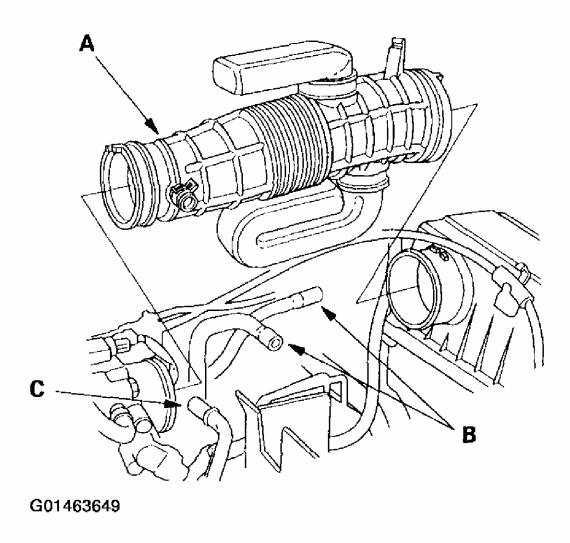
Installing The Intake Air Duct, The Vacuum Hoses & Breather Pipe Courtesy of AMERICAN HONDA MOTOR CO., INC.
